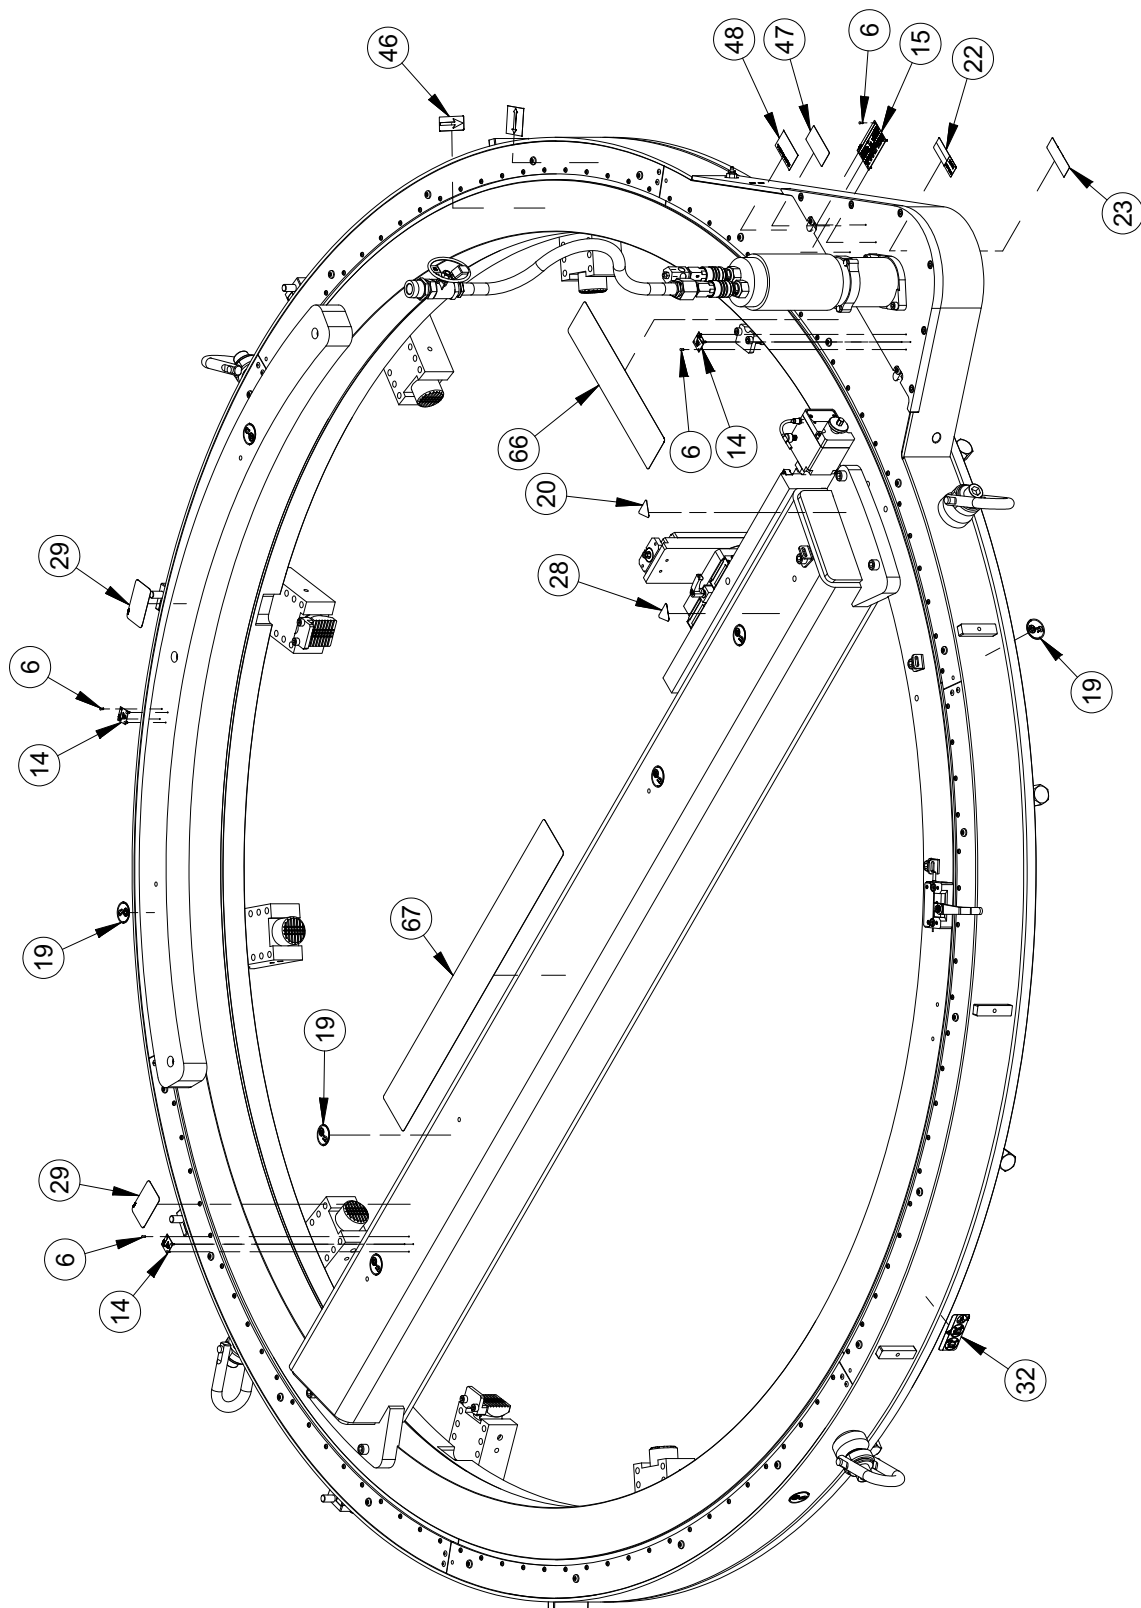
ODF90 SPEED FACER LABEL LOCATIONS (P/N 94780)
